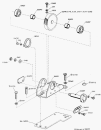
1987-1988 FORD MUSTANG 2.9L V6 ENGINE
